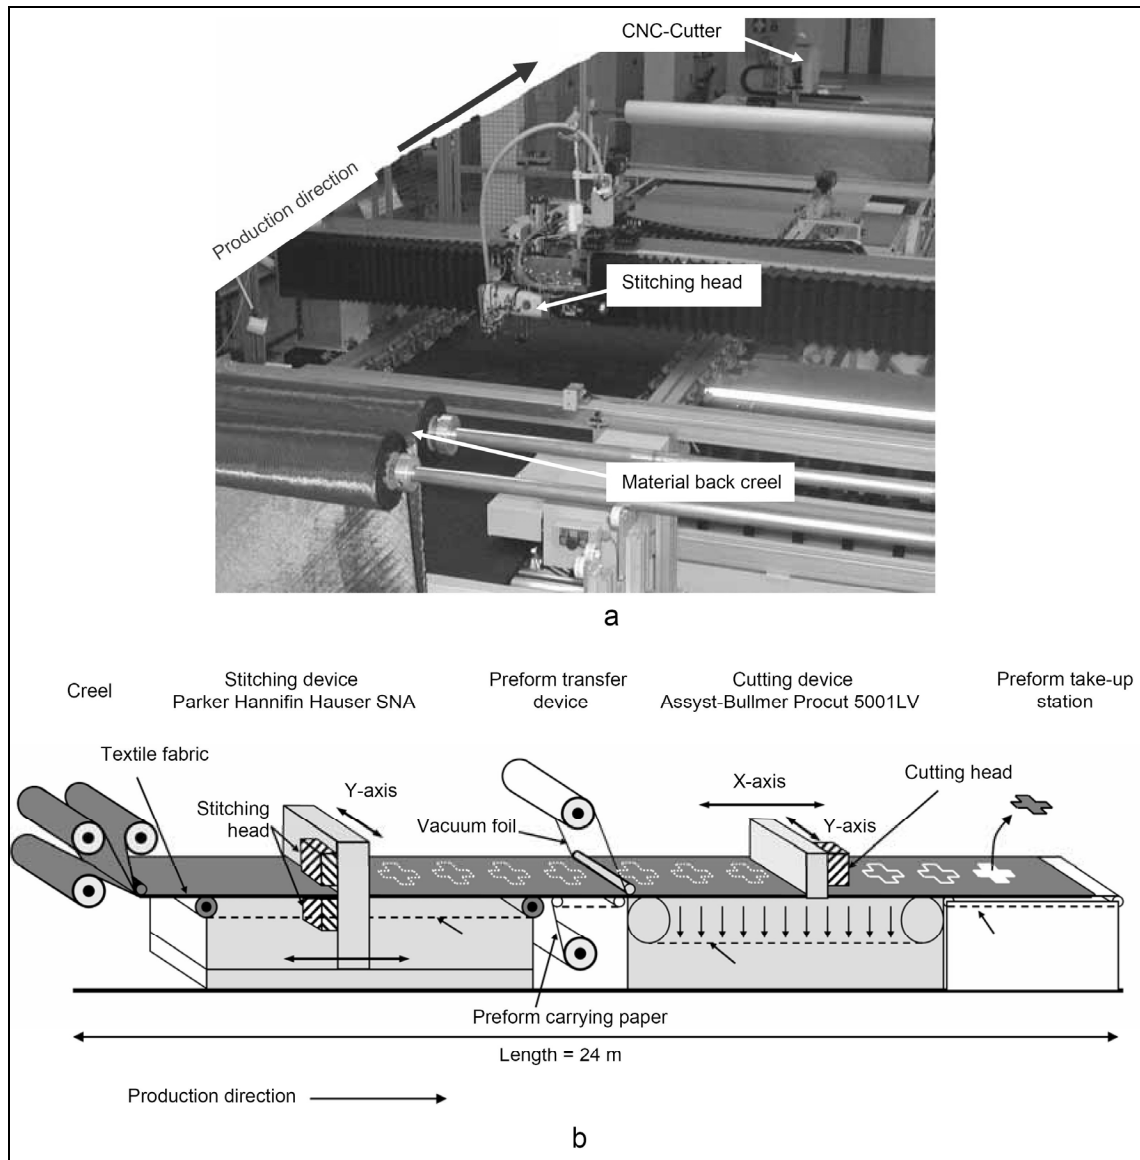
IVW lay-up-sew-cut machine modified to sew reinforcing fabrics: a) actual machine; b) schematic diagram [69]
